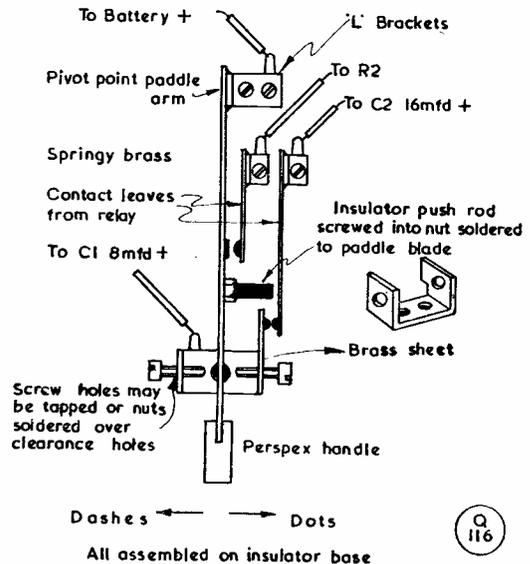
Electro-mechanical assembly of the auto-key. It should be mounted on a firm, insulating base; if this base is heavy enough and is fitted with rubber feet, the key can be made non-slip in operation.
